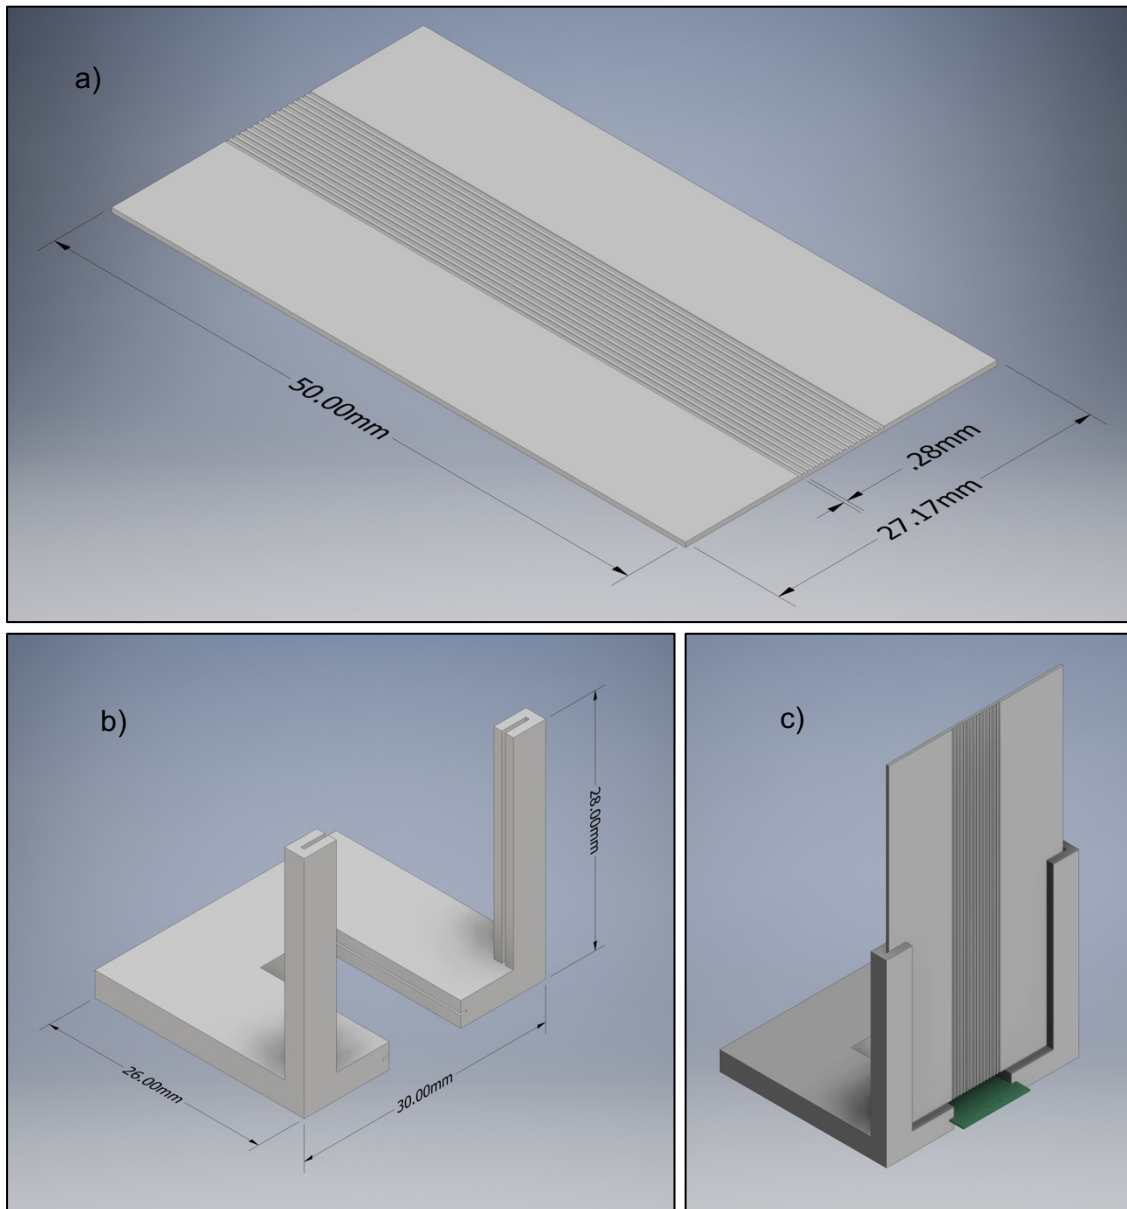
a) 15-fiber alignment jig. b) base. c) alignment jig and PCB in the base.
